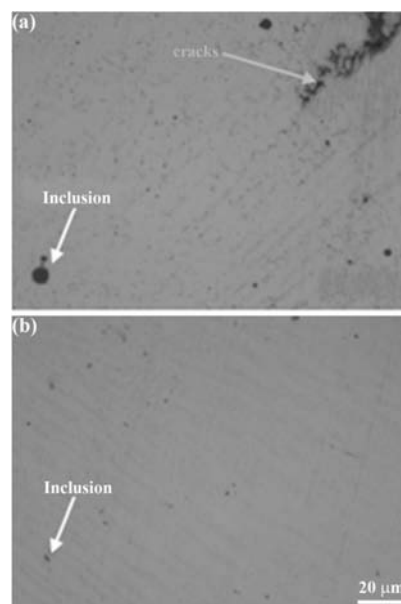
Microstructure with crack and inclusions after the Fisco hot crack test for welded samples (a) FCAW (b) Super-TIG
